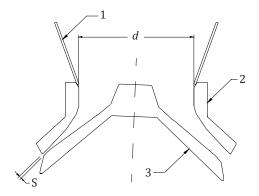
Example of horizontal shaft impact (HSI) crusher feed opening measurement
